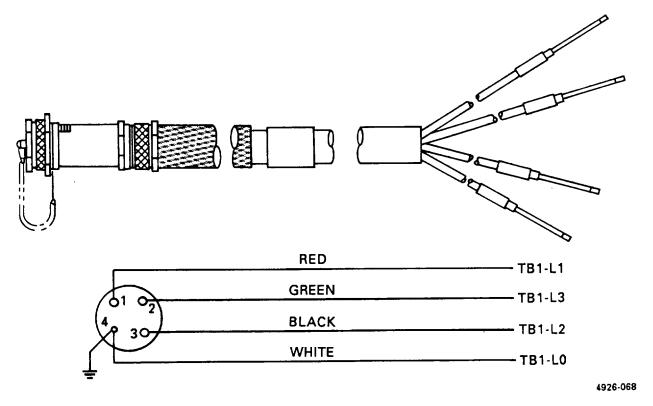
Cable Assembly CX-12160/TSQ-43A, drawing number SM-D-688553.
